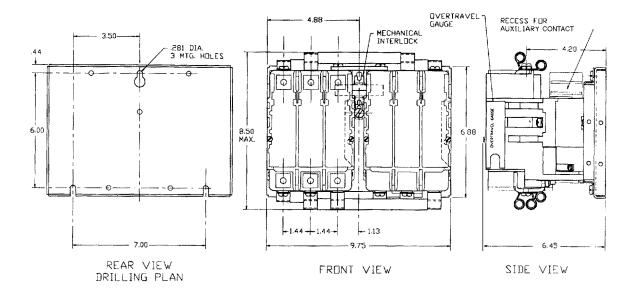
Dimensional Drawing (Inches), Class 8702 Type WFO
